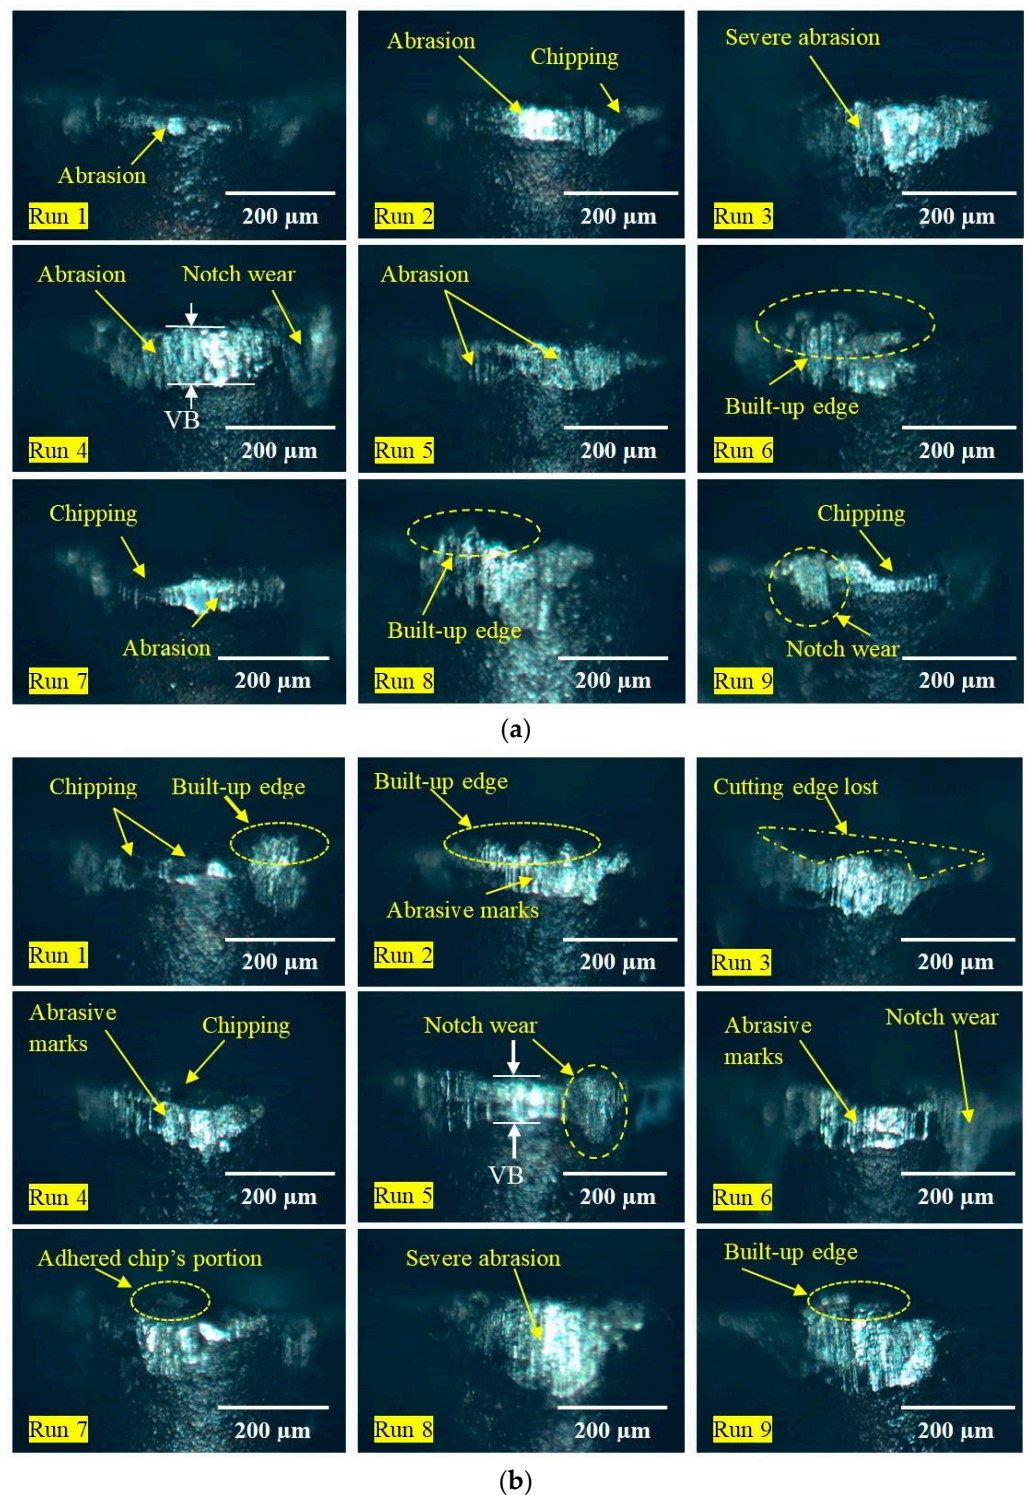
Tool-flank wear images obtained under (a) single nozzle and (b) double nozzle.
